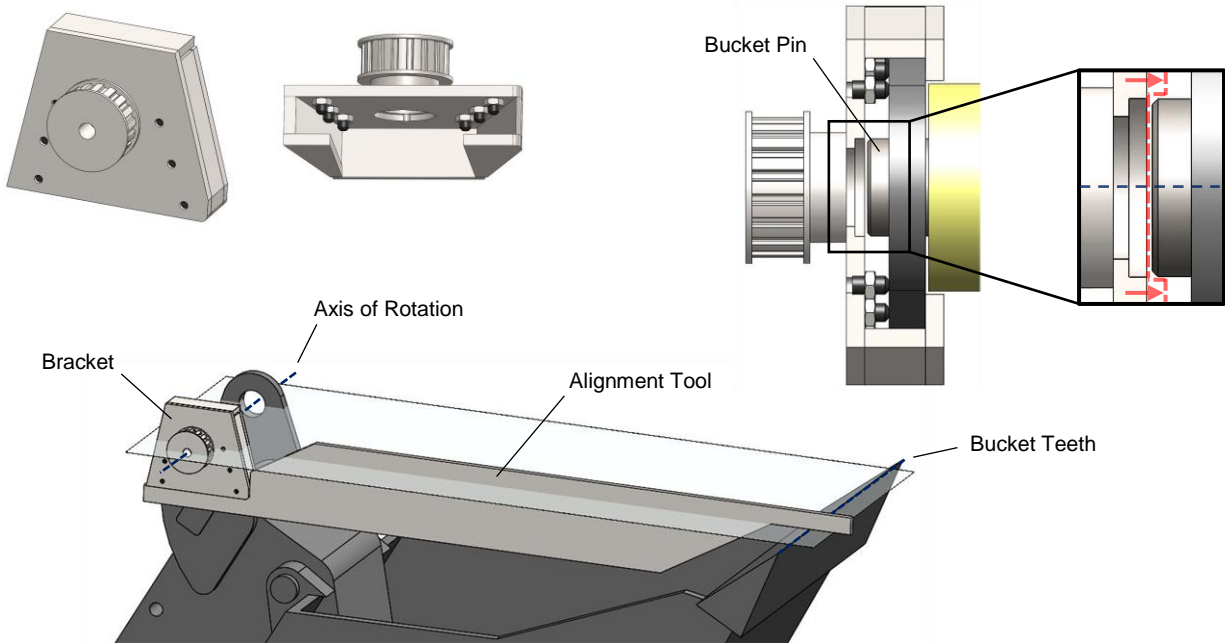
Alignment and clamping of synchronous belt device to excavator bucket
